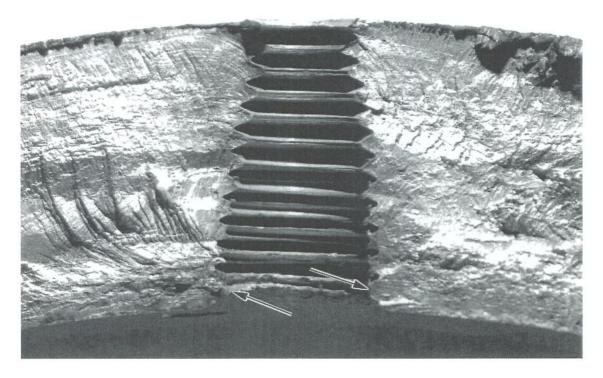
Detail showing the fatigue origins at the inner end of the damaged thread (outer half of the fracture) x6.5
